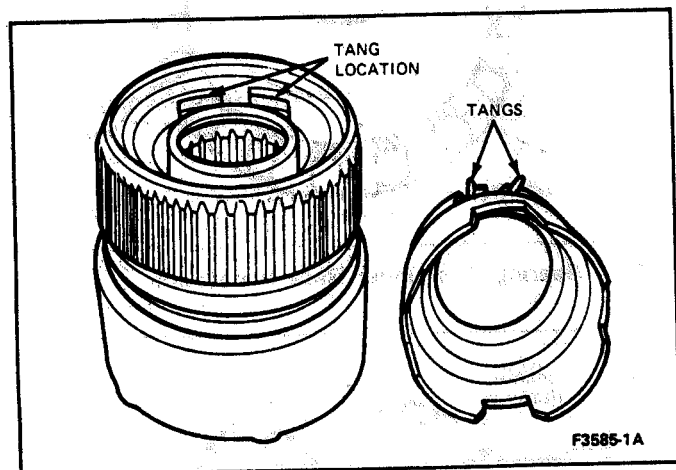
Brake Band and Drag Sleeve Assembly to Body Assembly Installation
